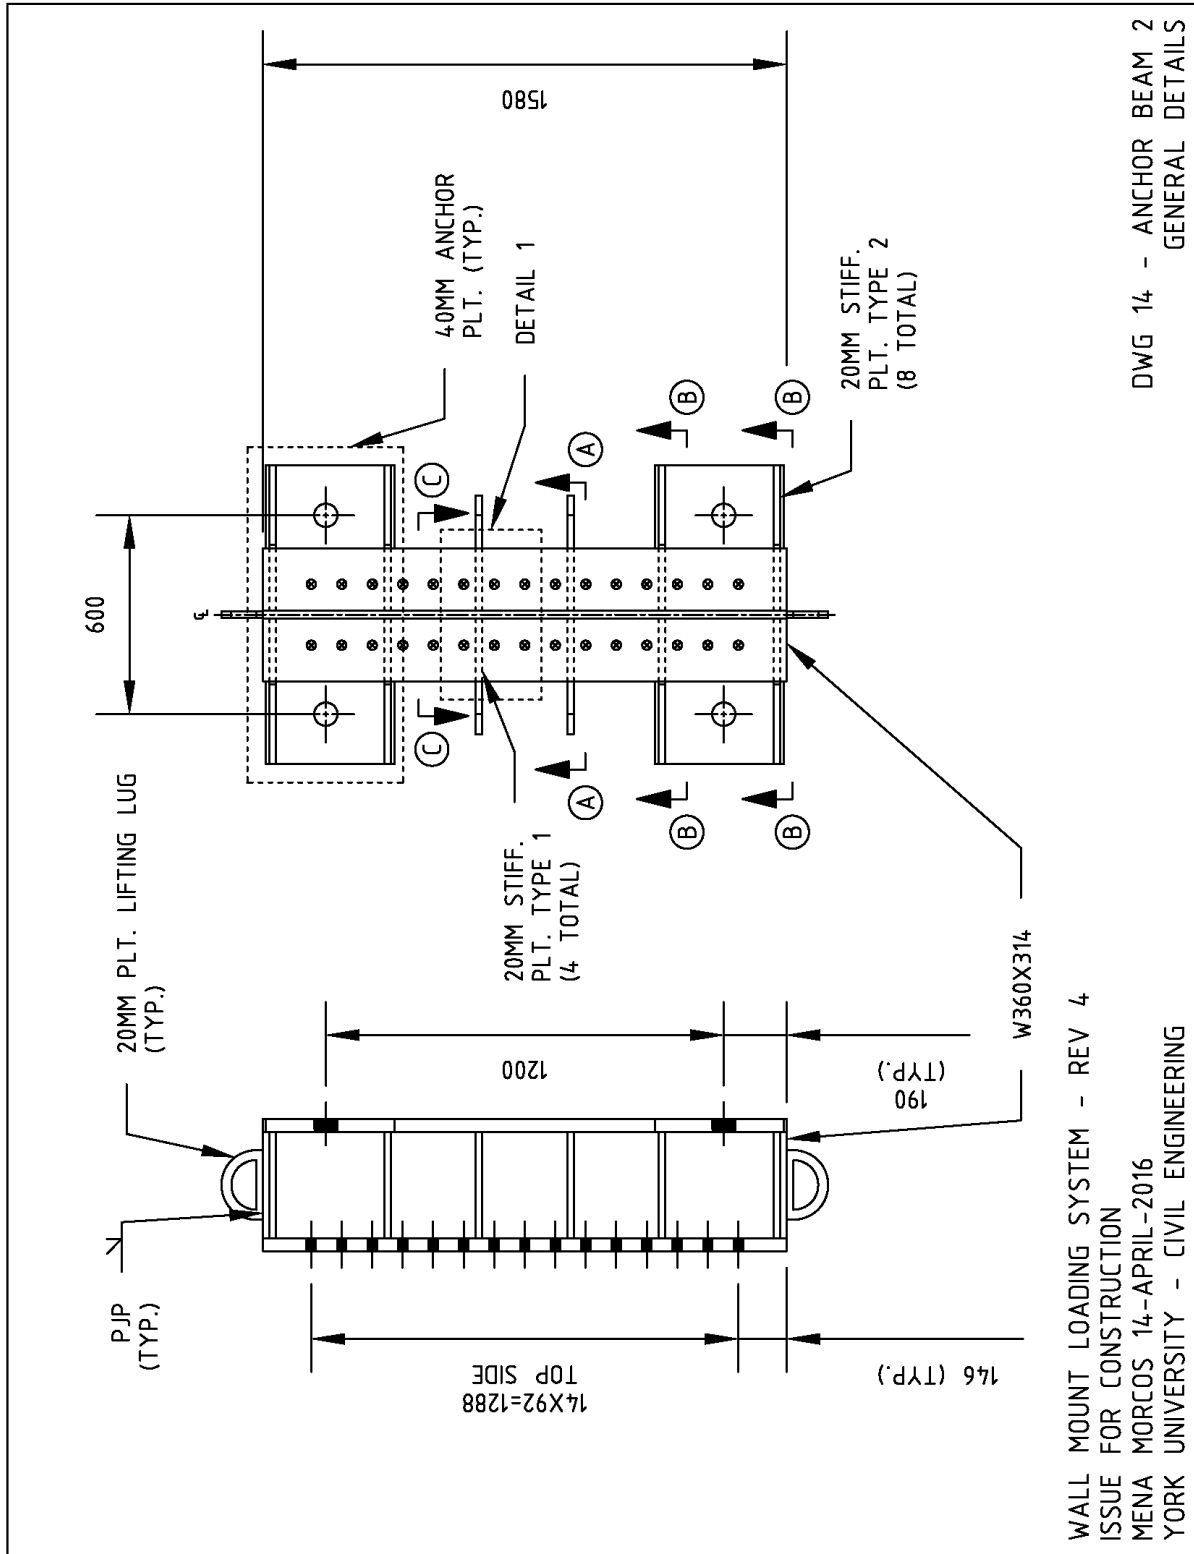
Wall mount loading system design and fabrication drawing – Drawing 14.
